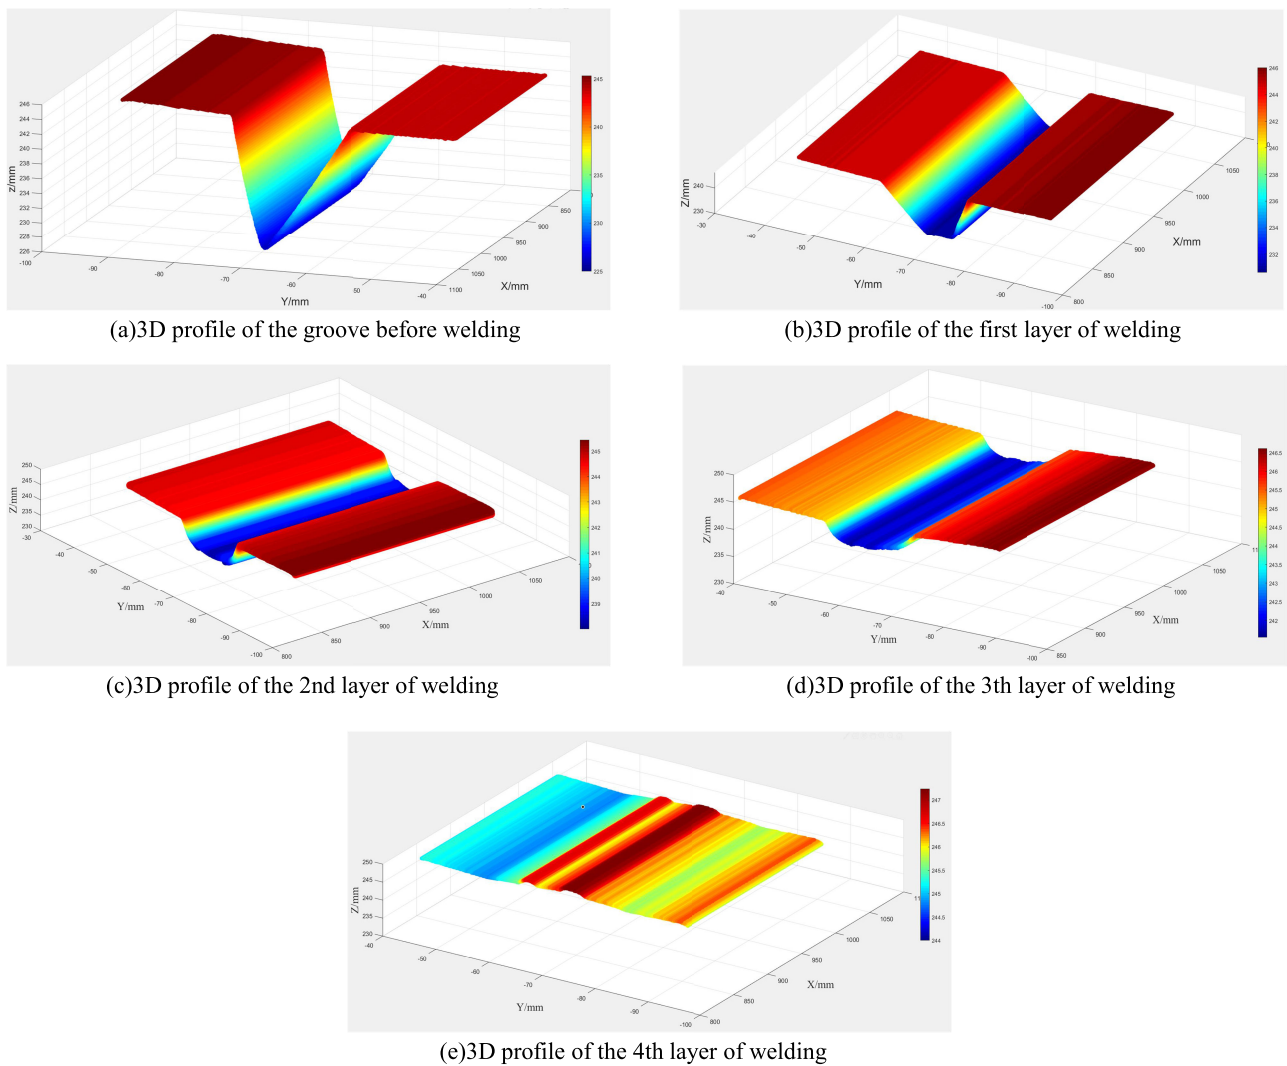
3D profile of the multi-layer single-pass welding.
